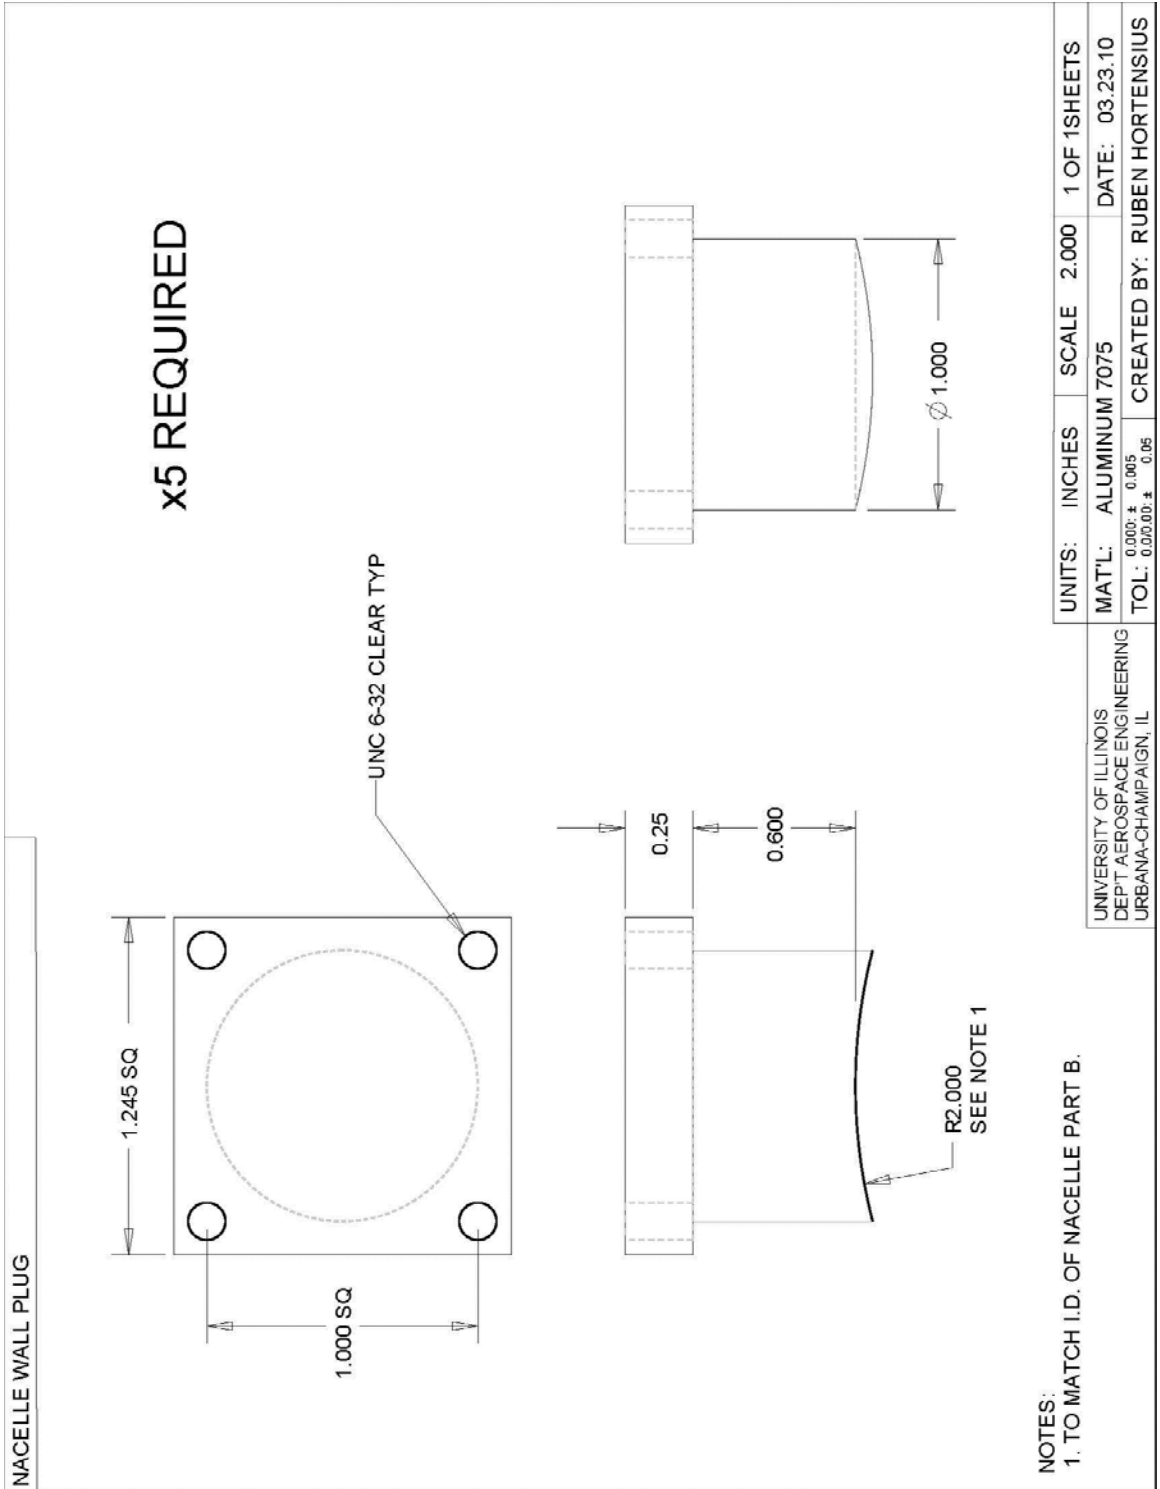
Nacelle Wall Plug Engineering Drawing.
